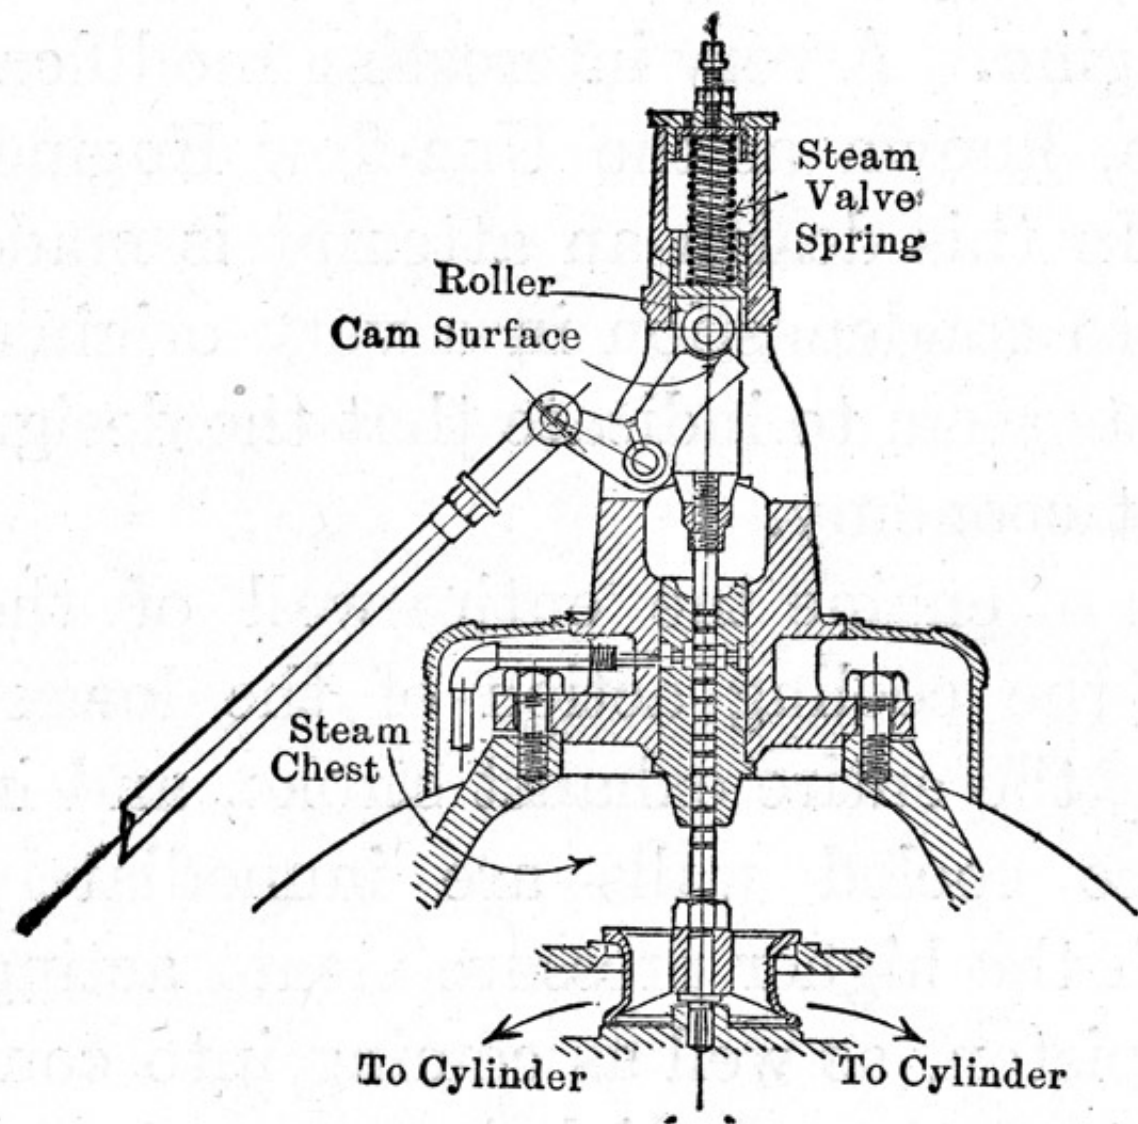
Admission Valve and Operating Mechanism, Lentz Engine.
